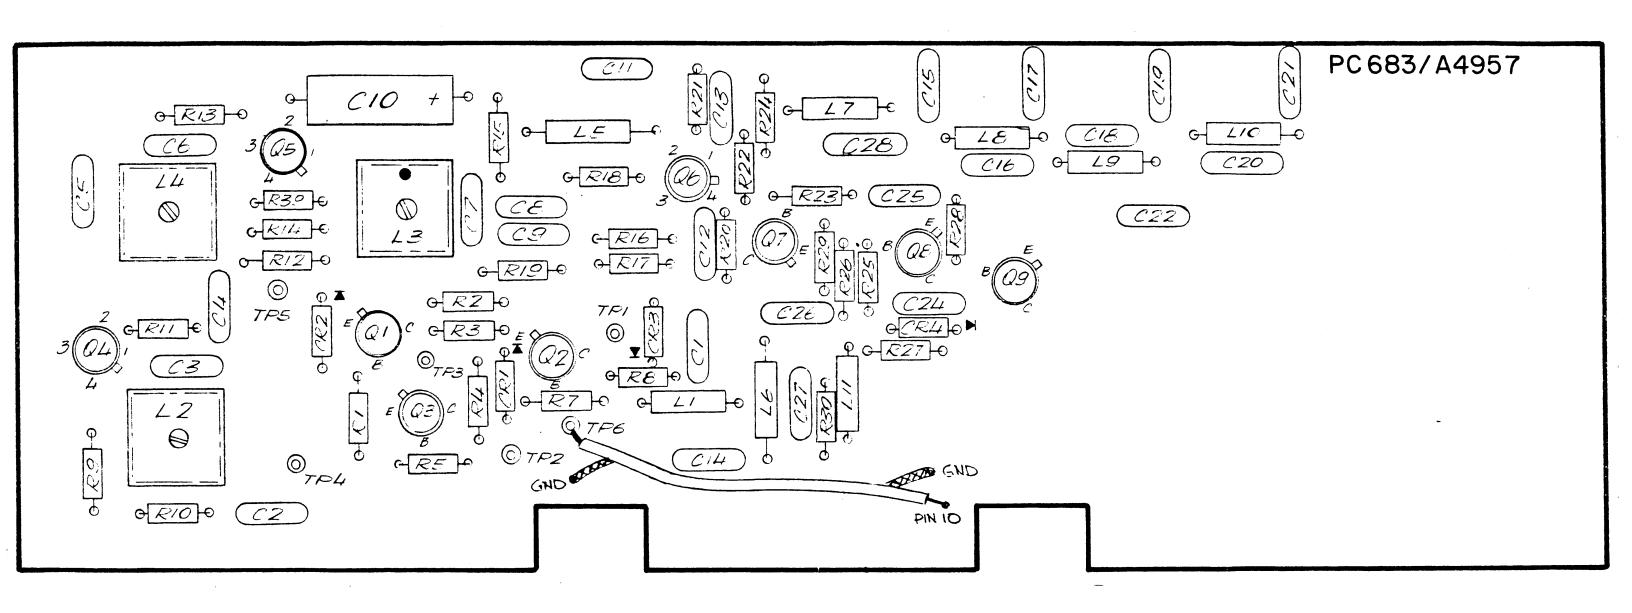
Mixer/Oscillator Control Assembly Z109, Location of Components
